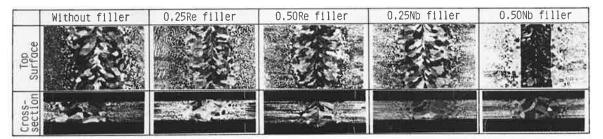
Macrostructures on top surface and crosssection of EB-Mo welds without and with Re or Nb filler metals.
